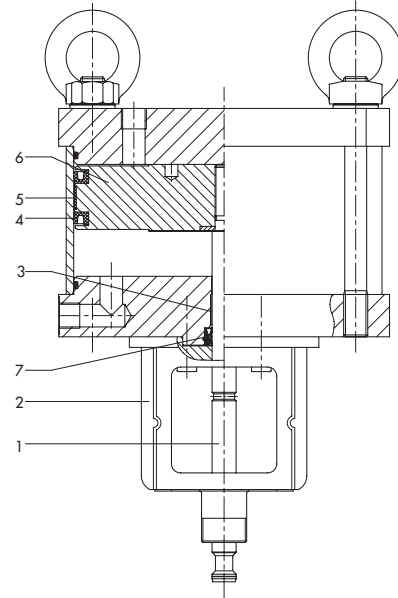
· Type 3275 Pneumatic Piston Actuator version with 314 or 490 cm² effective actuator area
